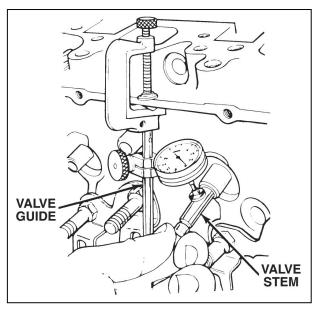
Measuring Stem-to-Bore Clearance (Typical)
